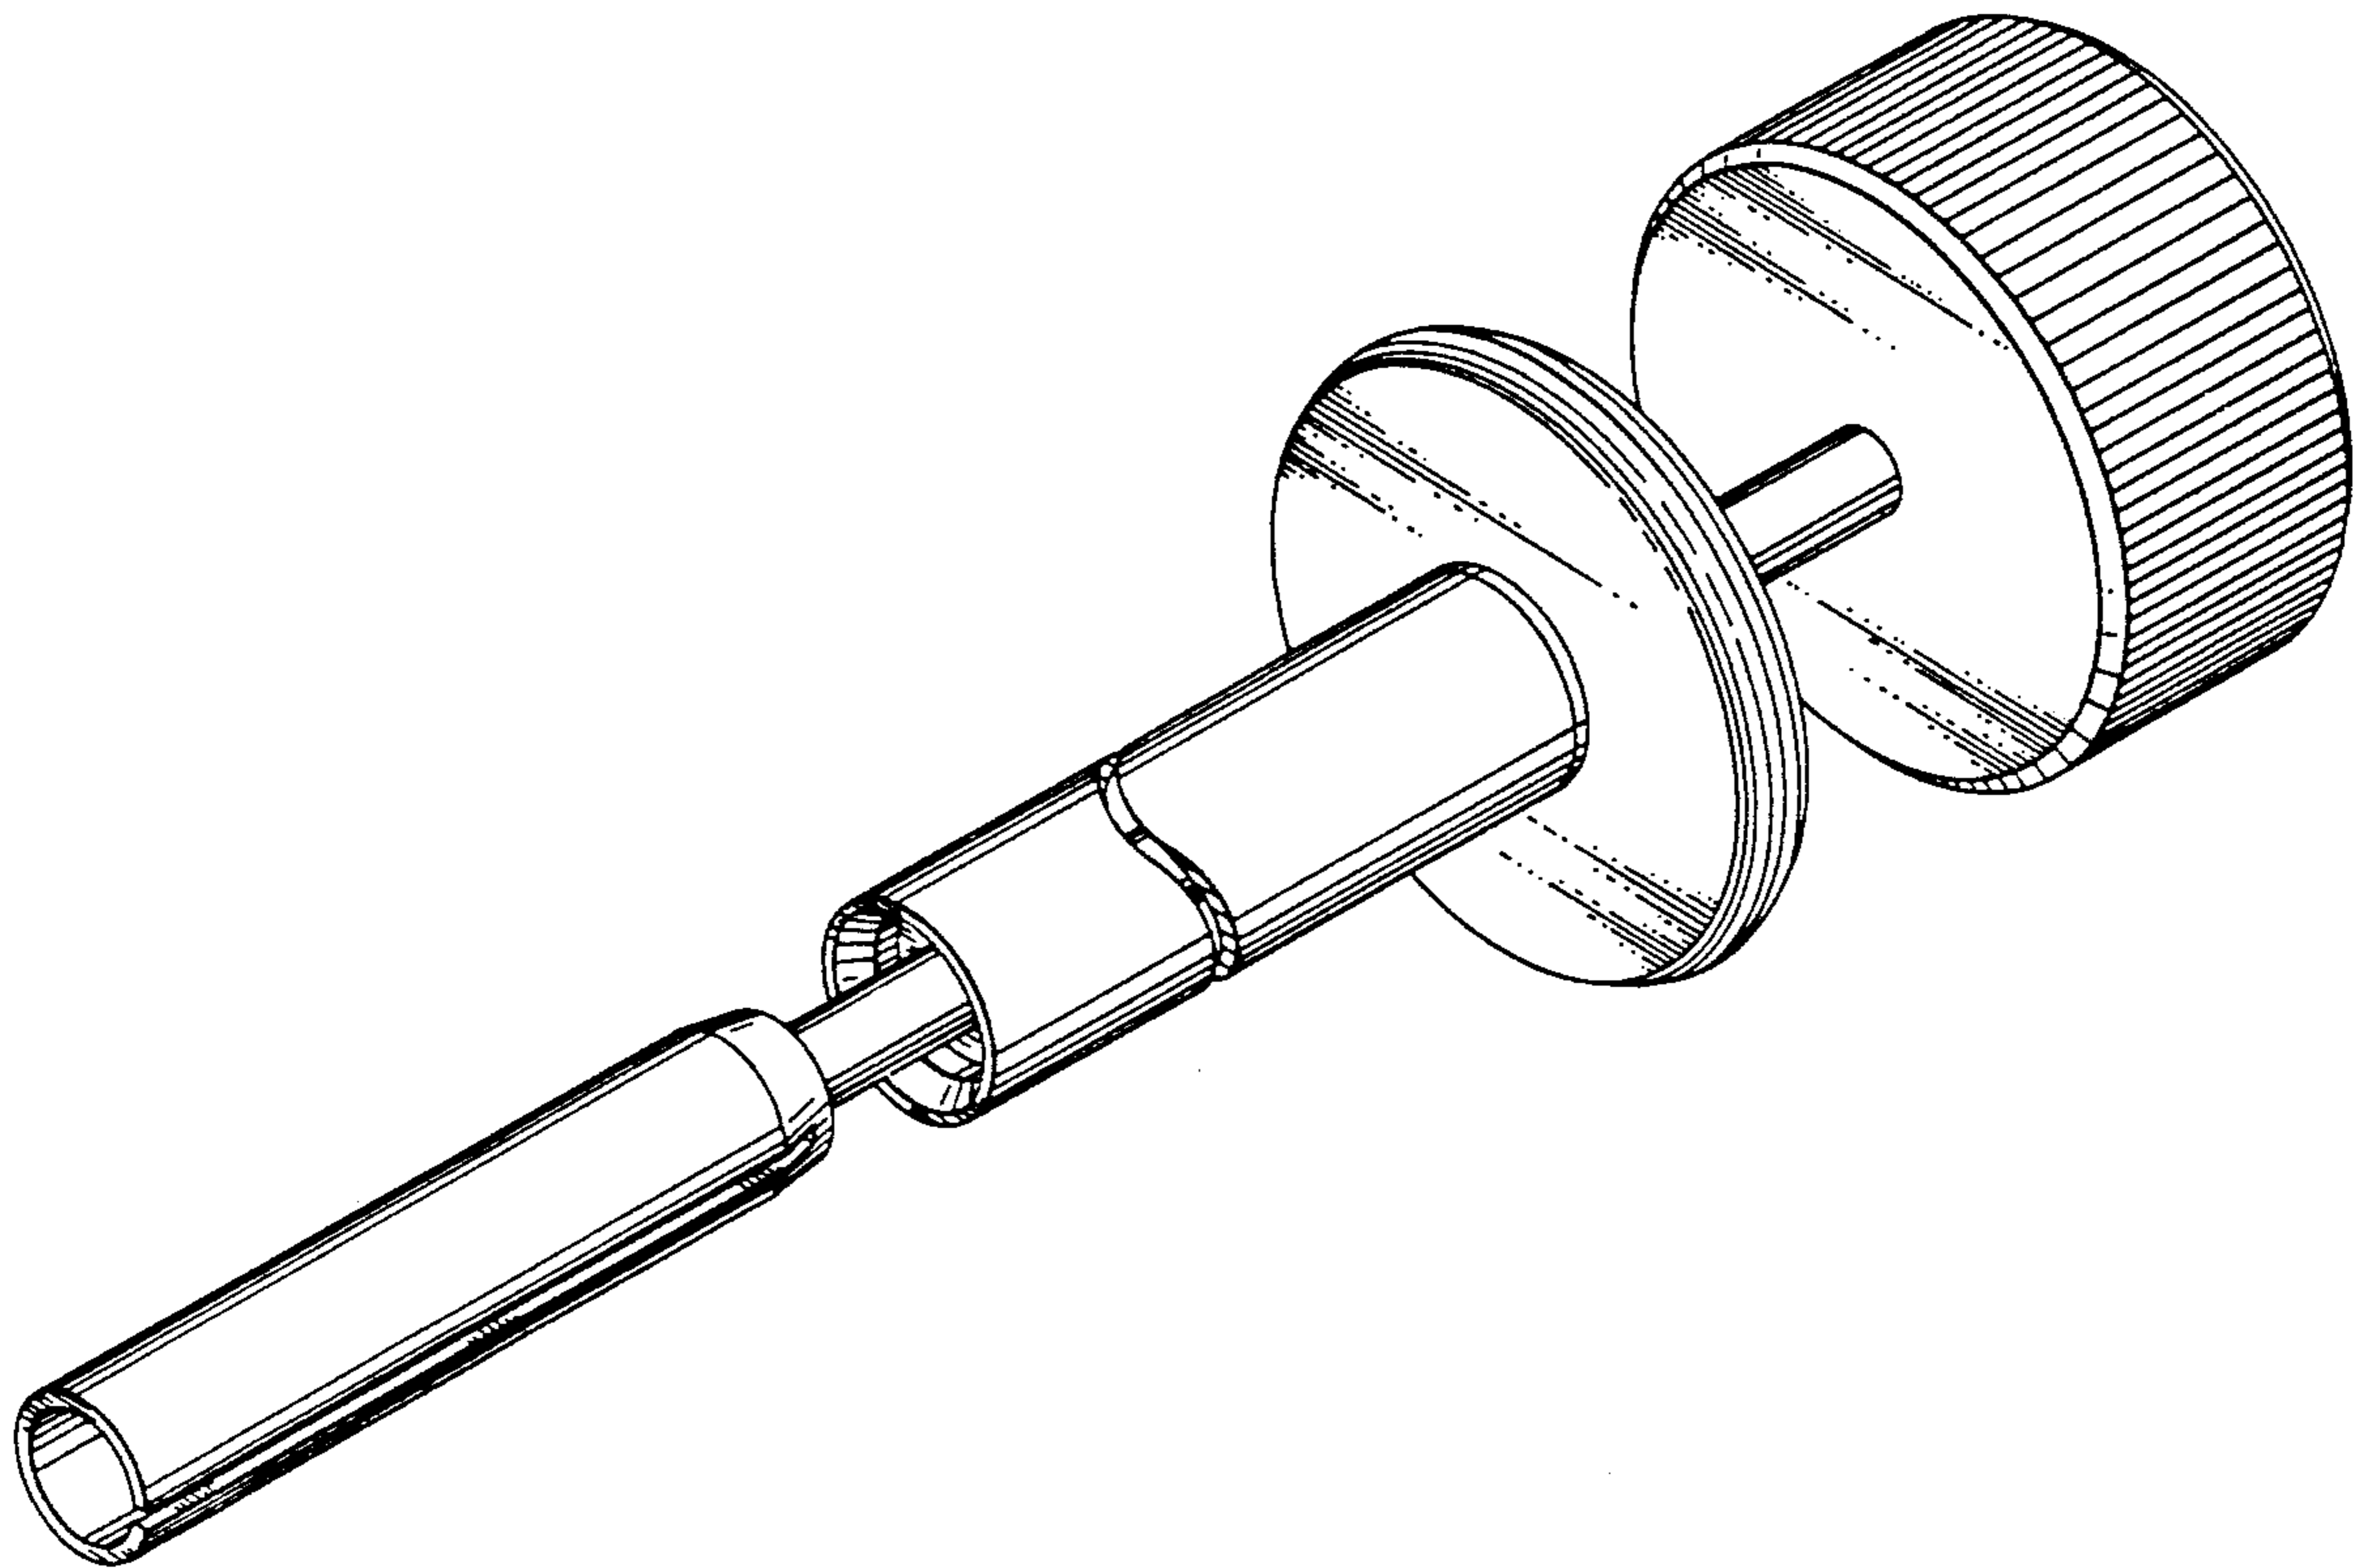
is an exterior perspective view of a laparoscopic tool for inserting a mesh prosthesis showing my new design;
